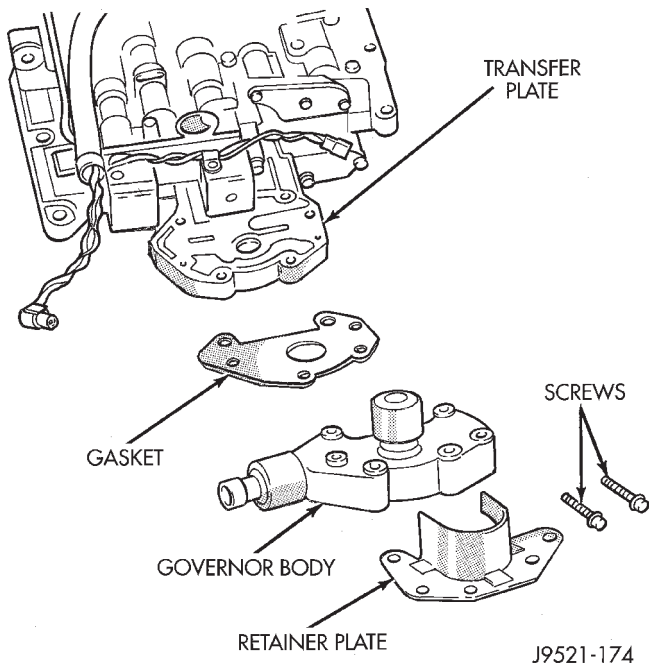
Governor Body, Retainer Plate And Gasket Removal
